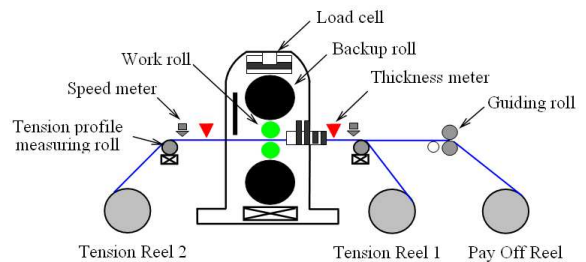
Schematic of a back-roll-drive 4-high cold rolling mill
